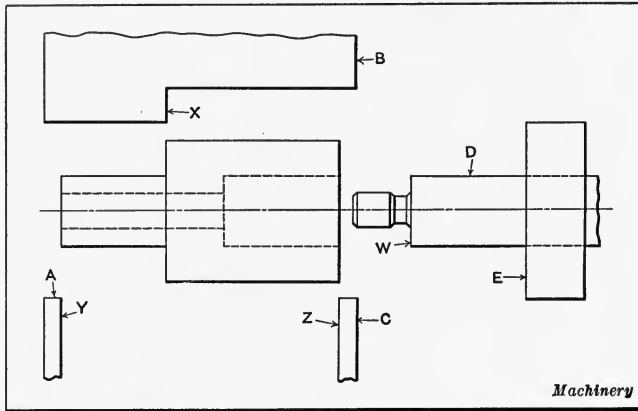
Diagrammatic Illustration of Tools used in machining Stud
